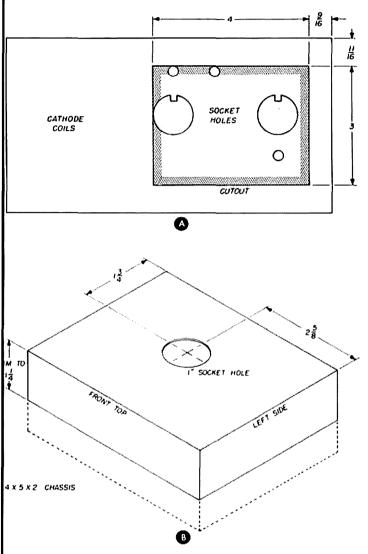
SB-200 chassis modifications to accomodate the 8875. The enclosure cutout for the sub-chassis is shown in A. The modified subchassis for the 8875 socket is shown in B.
